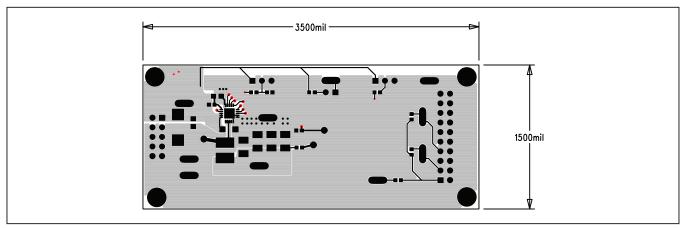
MAX20010 EV Kit PCB Layout—Component Side
